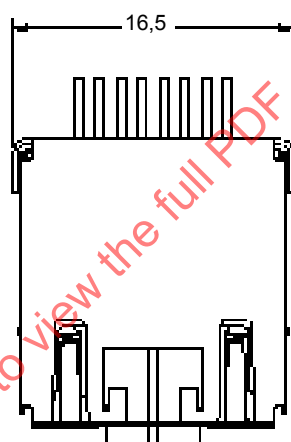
Front view fixed board connector (XB) right angle (version 2)
